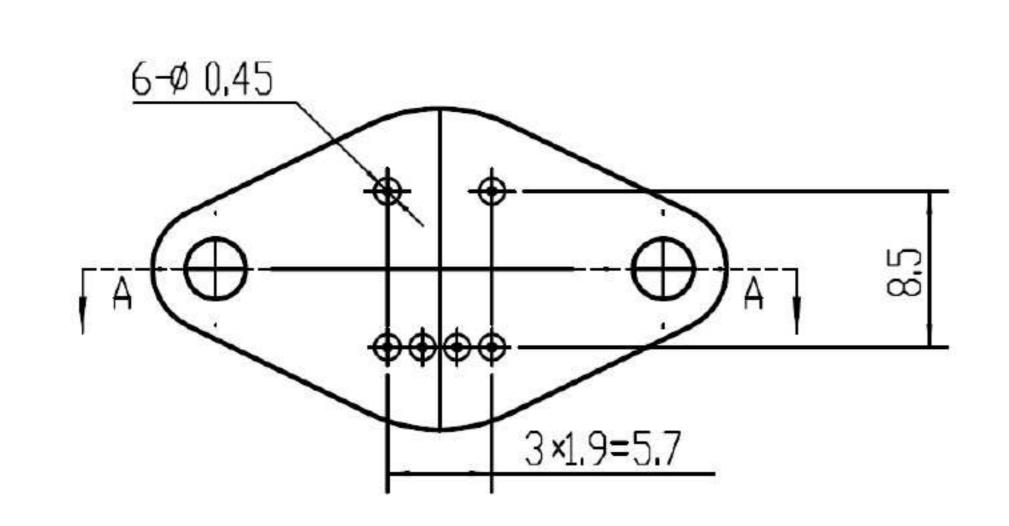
External Dimensions 1 (Unmarked dimension tolerance ±0.1mm)
